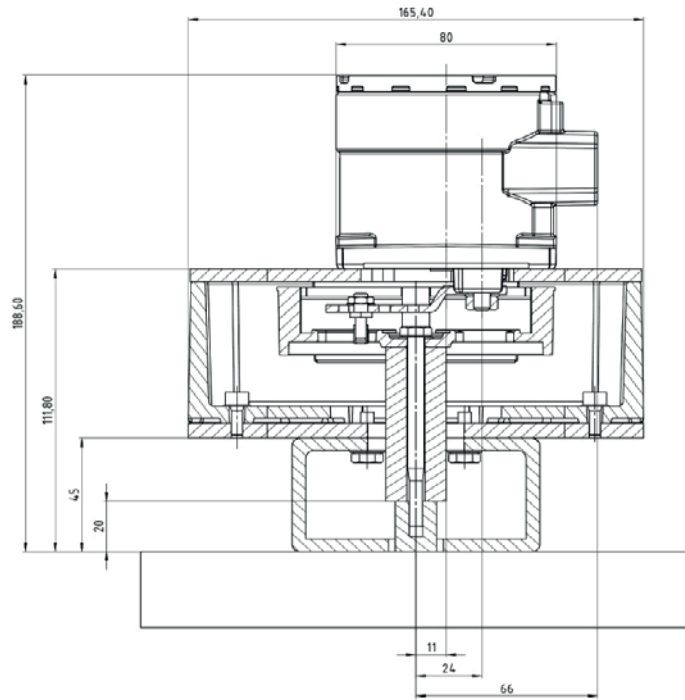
Attachment to rotary actuators according to VDI/VDE 3845 (09-2010), fixing level 2 (heavy-duty version)
